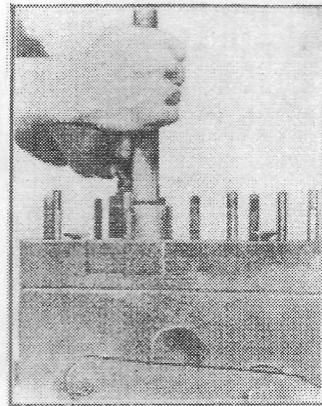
Fitting the piston. The steel base is held lightly by means of plates to compress the piston rings while the piston is gently tamped home by tapping it with a hammer handle.
